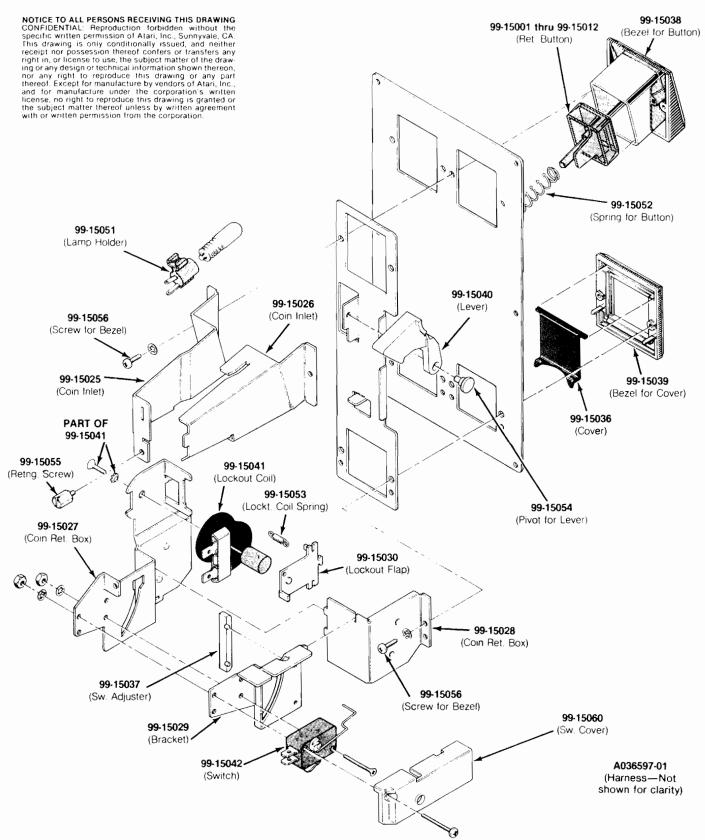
Double Coin Acceptor/Mount Assembly A036693-xx A
